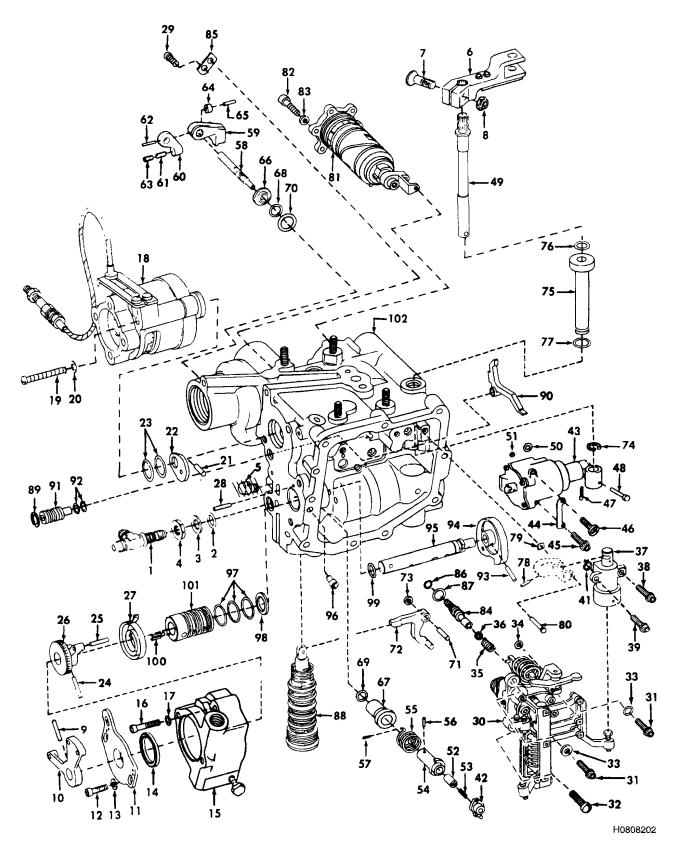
Afterburner Control Assembly - View No. 2 (Sheet 1 of 2)
